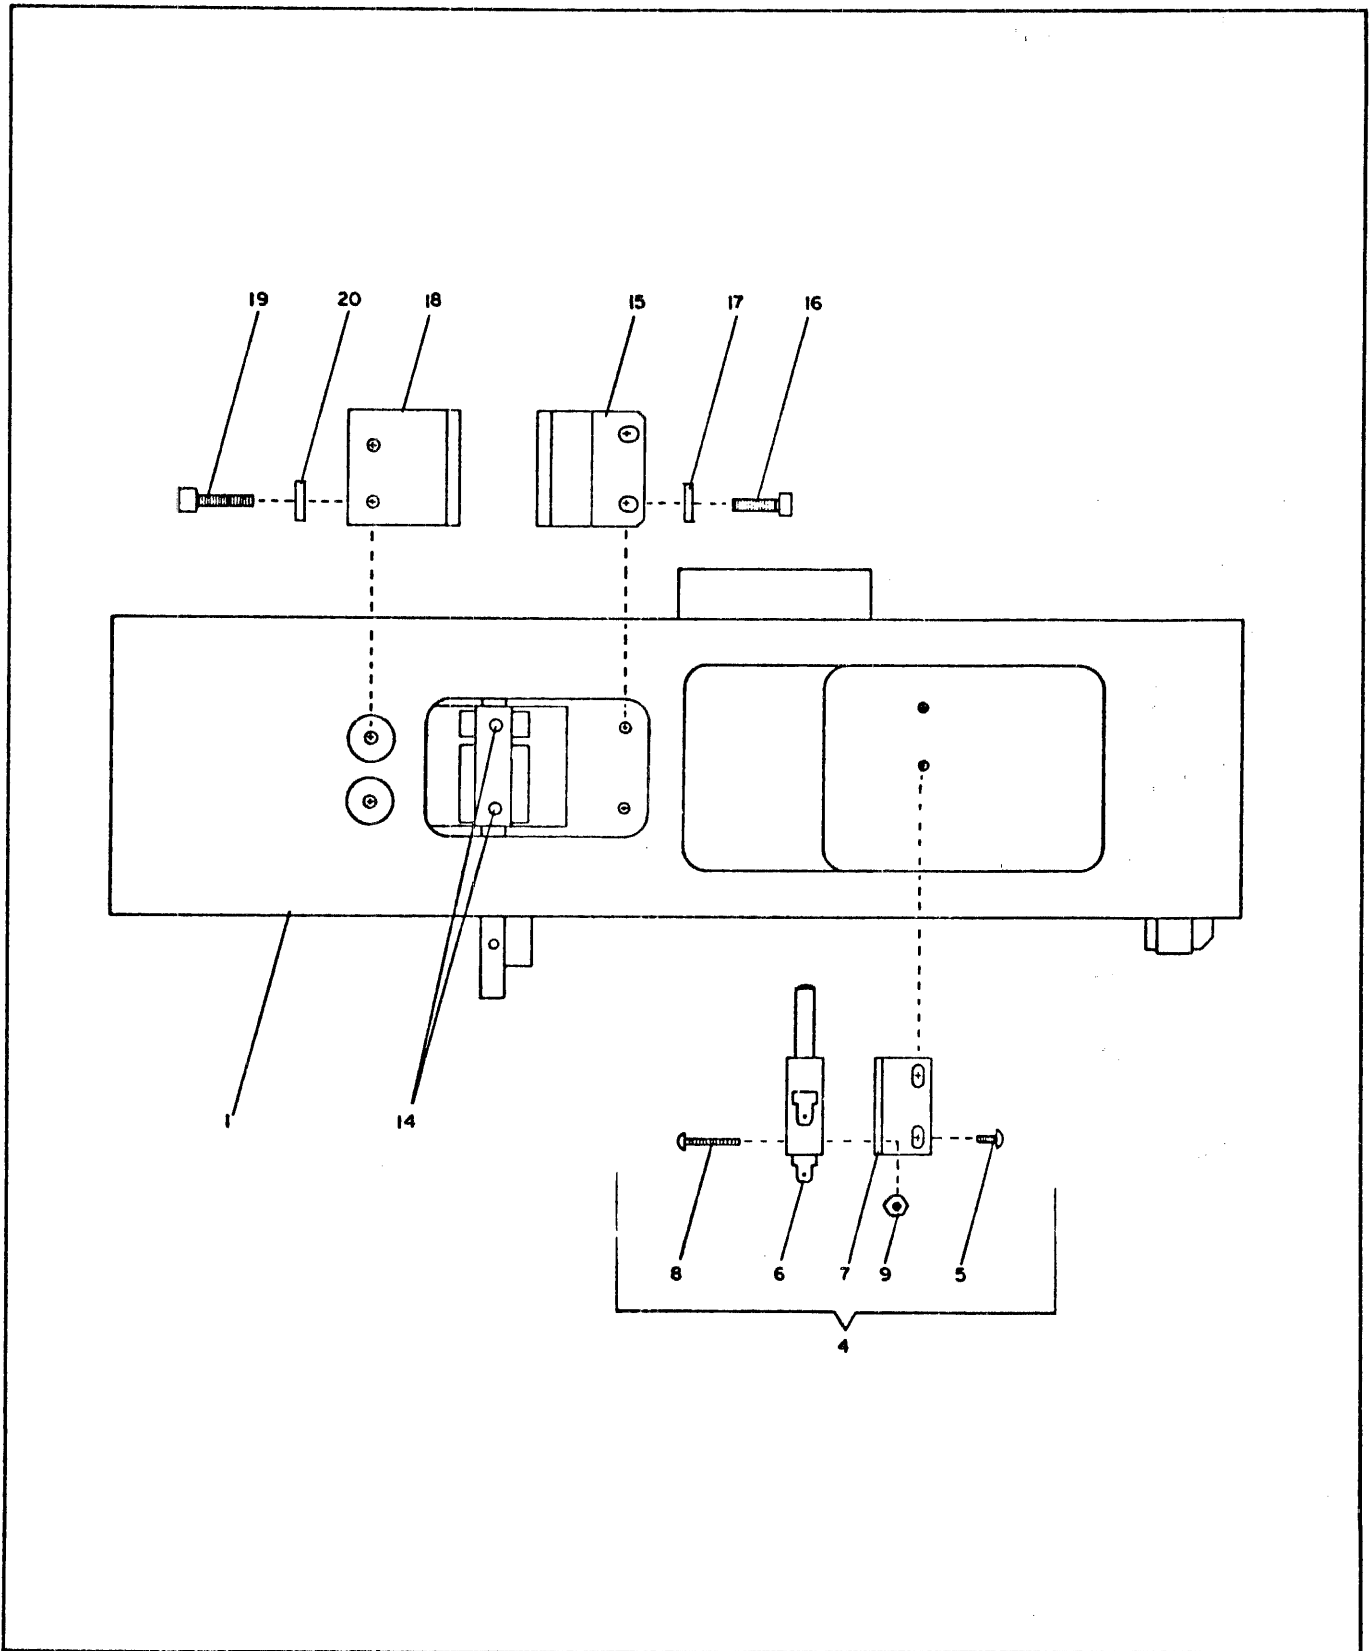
PICK SUPPORT ASSEMBLY (sheet 2 of 2)
